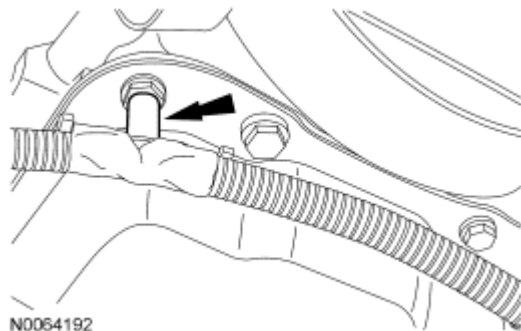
Detaching Wiring Harness Retainer From Oil Pan Stud Bolt
